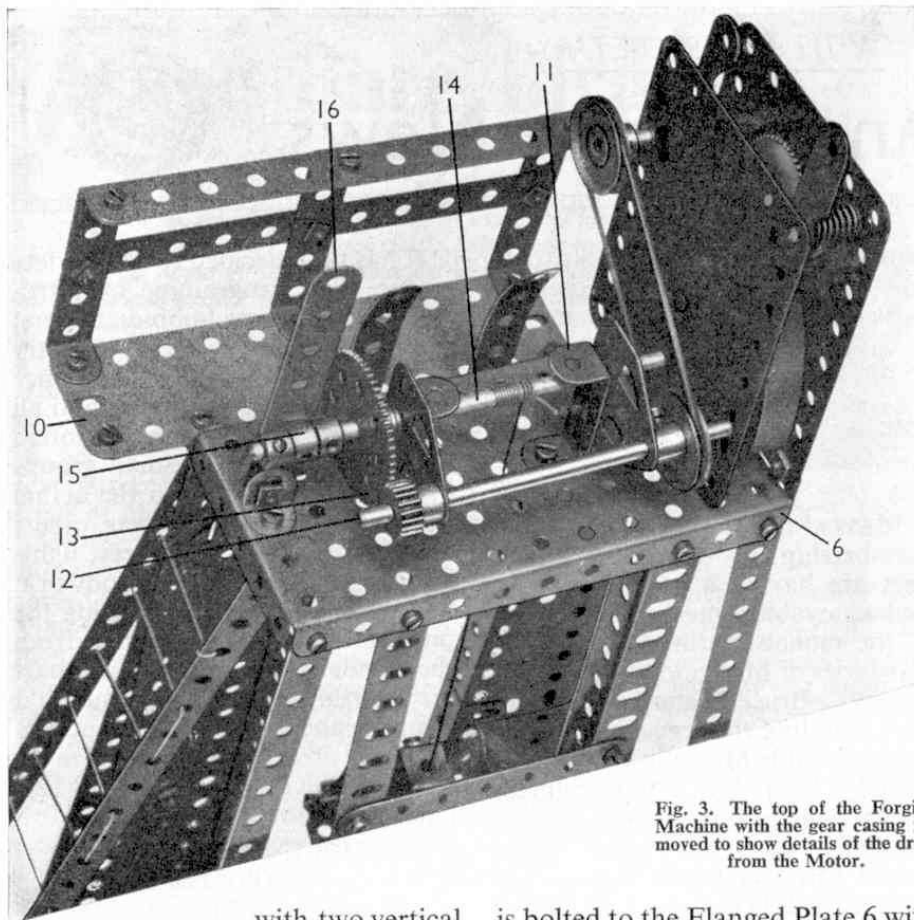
The top of the Forging Machine with the gear casing removed to show details of the drive from the Motor.
